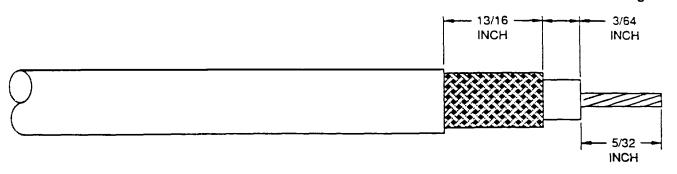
Strip Dimensions for Coaxial Solder Contacts (Sheet 1 of 2)
